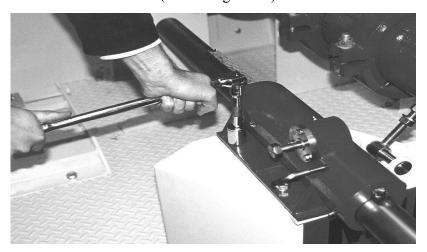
Adjustment of outboard cutter horizontal alignment
